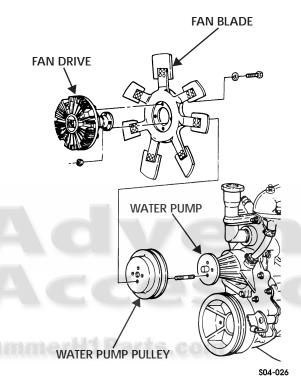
Fan Drive, Fan Blade, and Water Pump Pulley
